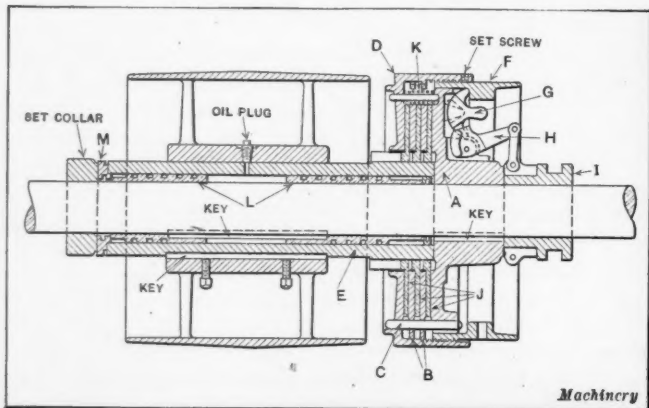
Sectional View of Moore & White High-speed Friction Clutch
